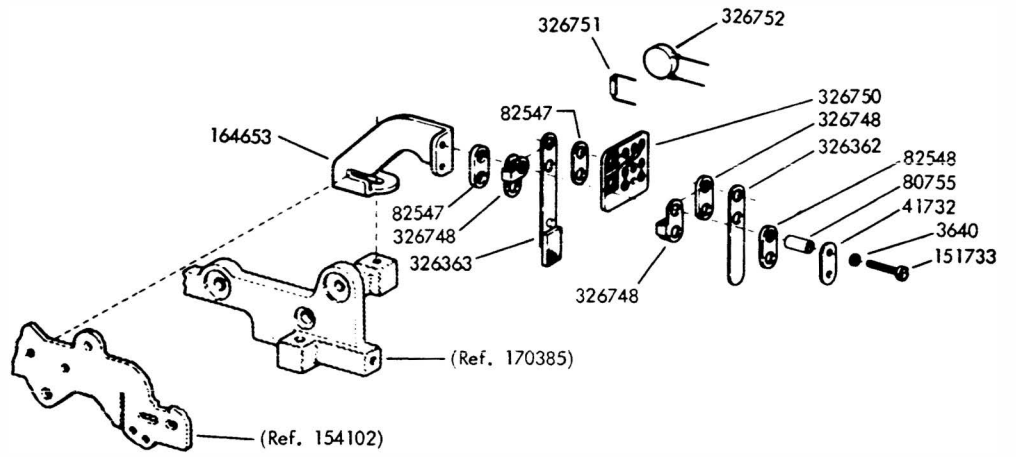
326357 CONTACT ASSEMBLY (LK and LAK)
